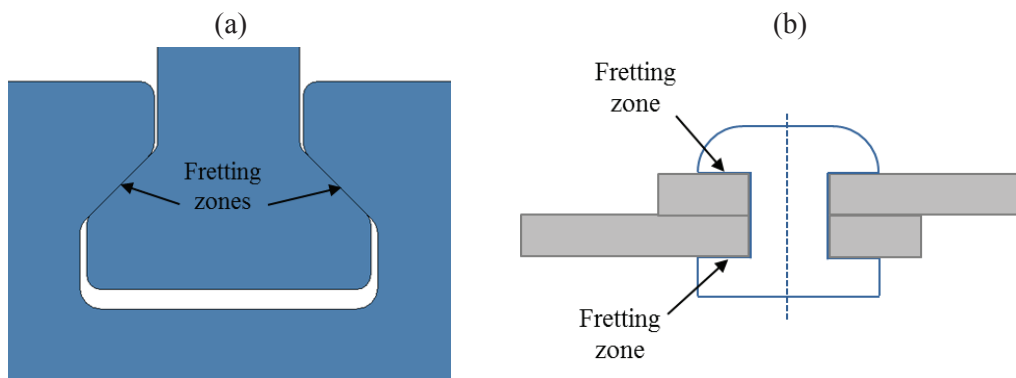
Examples of fretting fatigue problems showing fretting zones for (a) dove tail joint and (b) riveted lap joint.
